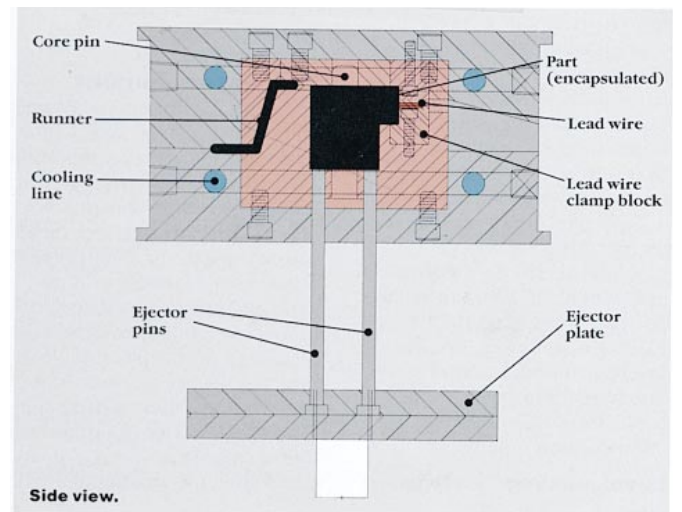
Modular mould for encapsulating a solenoid coil in a vertical-clamp press (side view).
